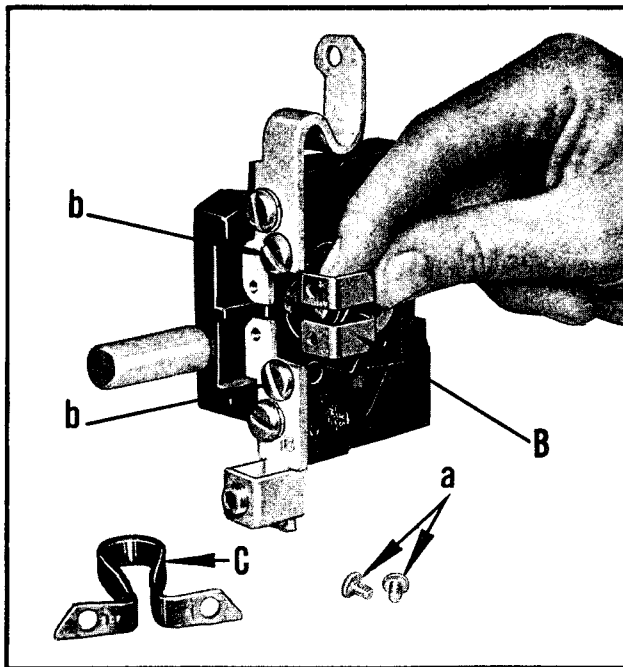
Install Heater "B" in the Relay, Using Small Screws "a" Threaded Into Holes or Install Heater "C" Using Larger Screws "b". Be sure the Looped Portion Enters the Recess in the Relay.
